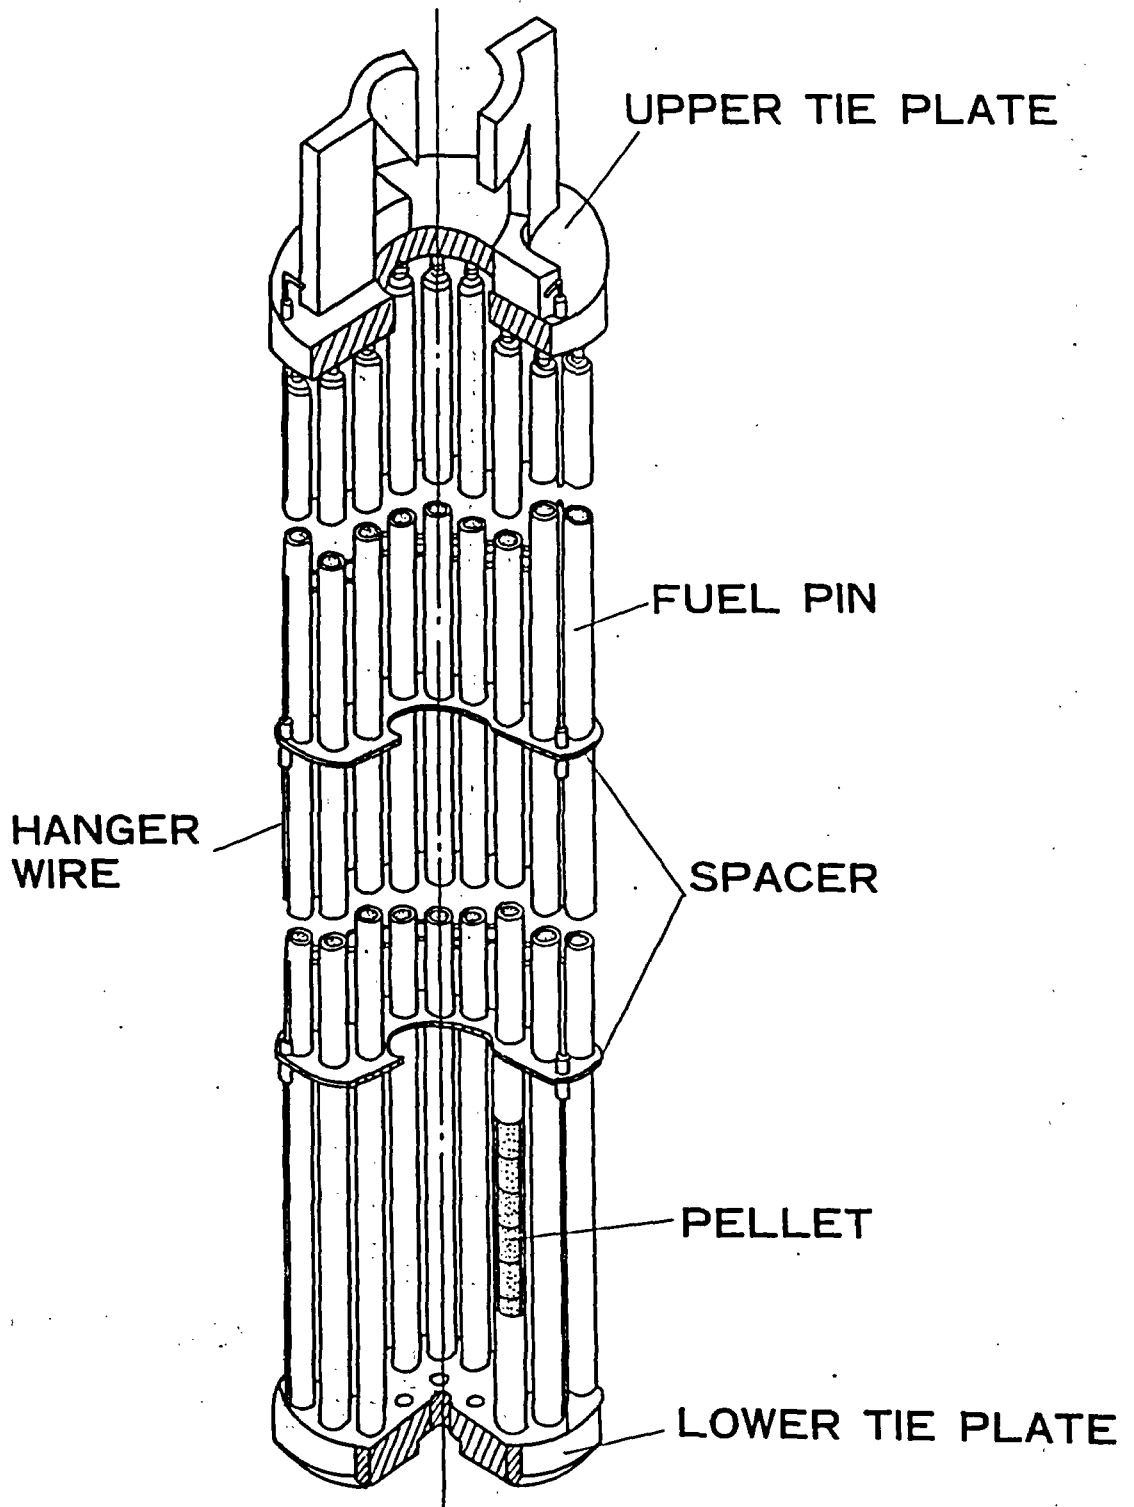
Schematic Drawing of 54-pin Test Fuel Cluster
